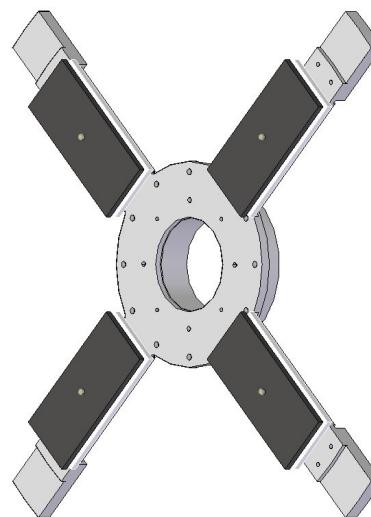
A drawing of graphite blocks mounted on ceramic plates, in turn mounted onto a steel frame which holds the protection electrode.
